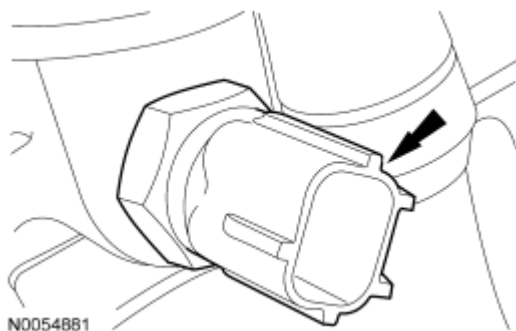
Identifying Cylinder Head Temperature (CHT) Sensor
